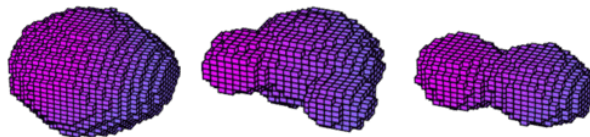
Views in three dimensions of three non-spherical defects, segmented from the tomography image of welded joints.
